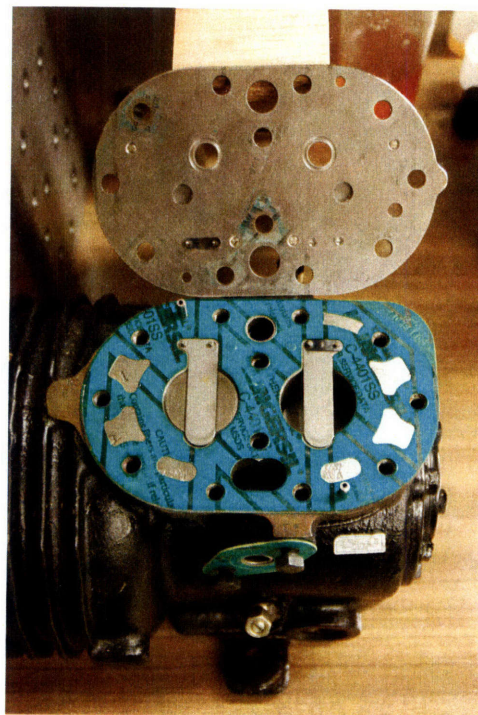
View of compressor internals, with the bottom of the valve plate and the suction valves.
